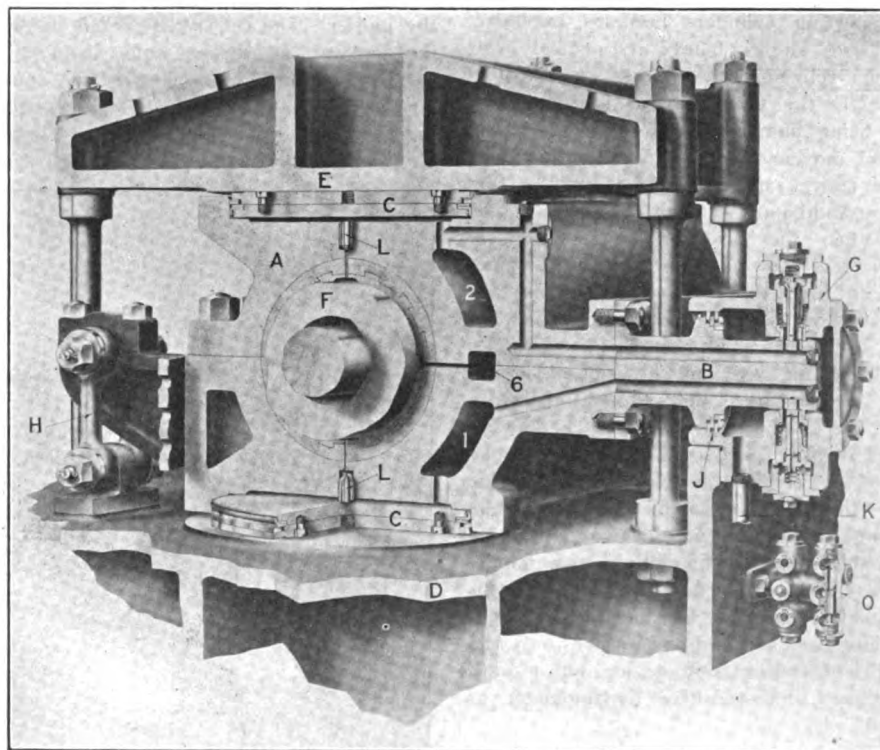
SECTION THROUGH THE FLOATING FRAME AT THE MIDDLE BEARING
